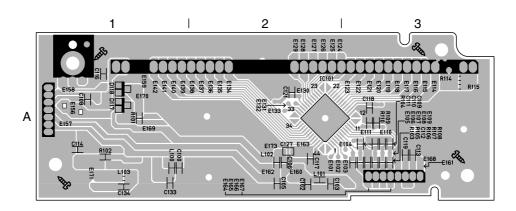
EU03A Front (R) PC Board (Bottom side)
